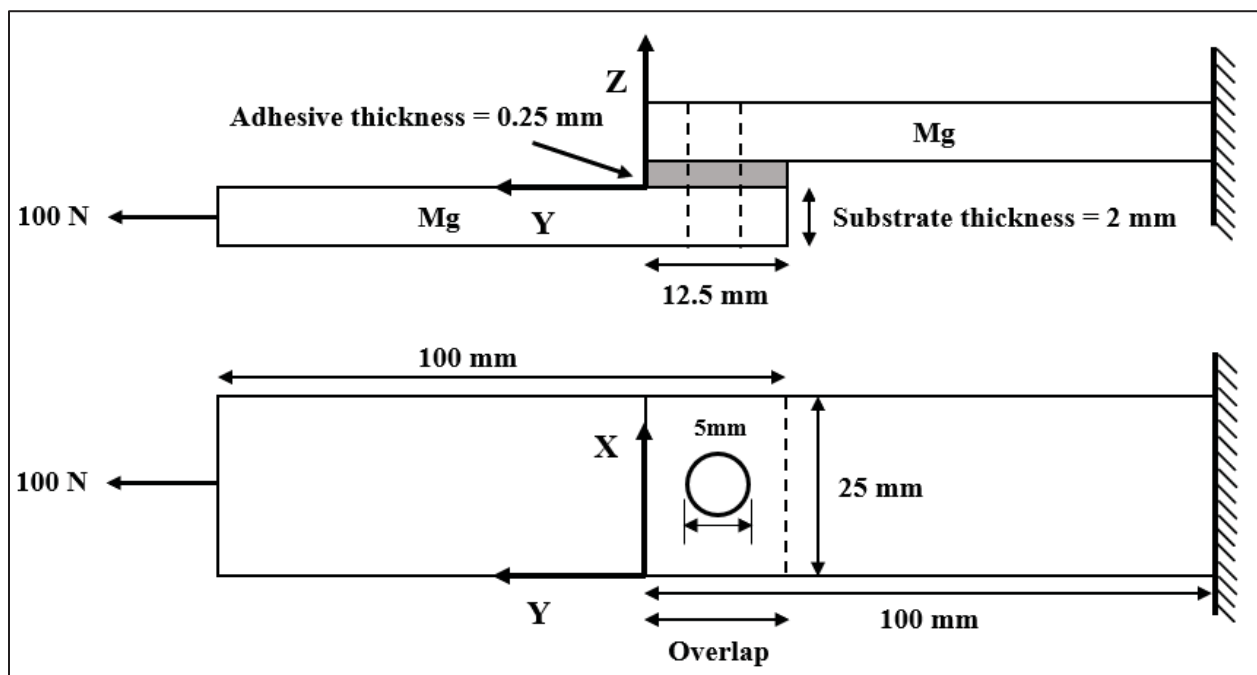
Specimen dimensions with a hole at the center of the overlap in a single-lap joint
